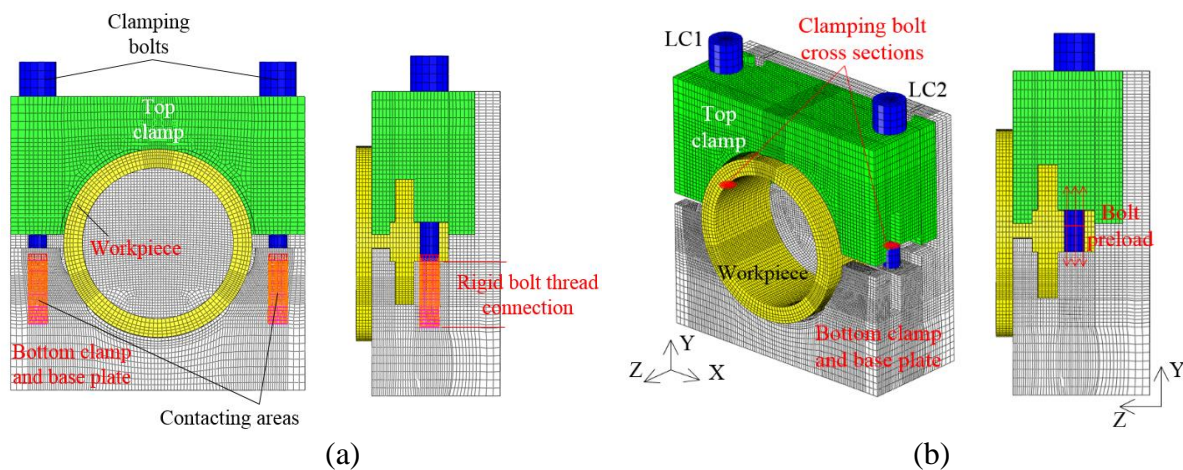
FEM setups for workpiece deformation due to clamping forces: (a) rigid bolt connections and (b) clamping force load.
